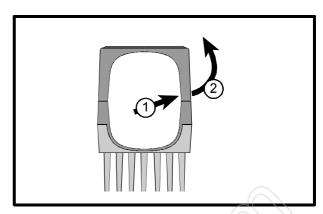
View from the underside showing how a terminal cover is removed from the Drive
